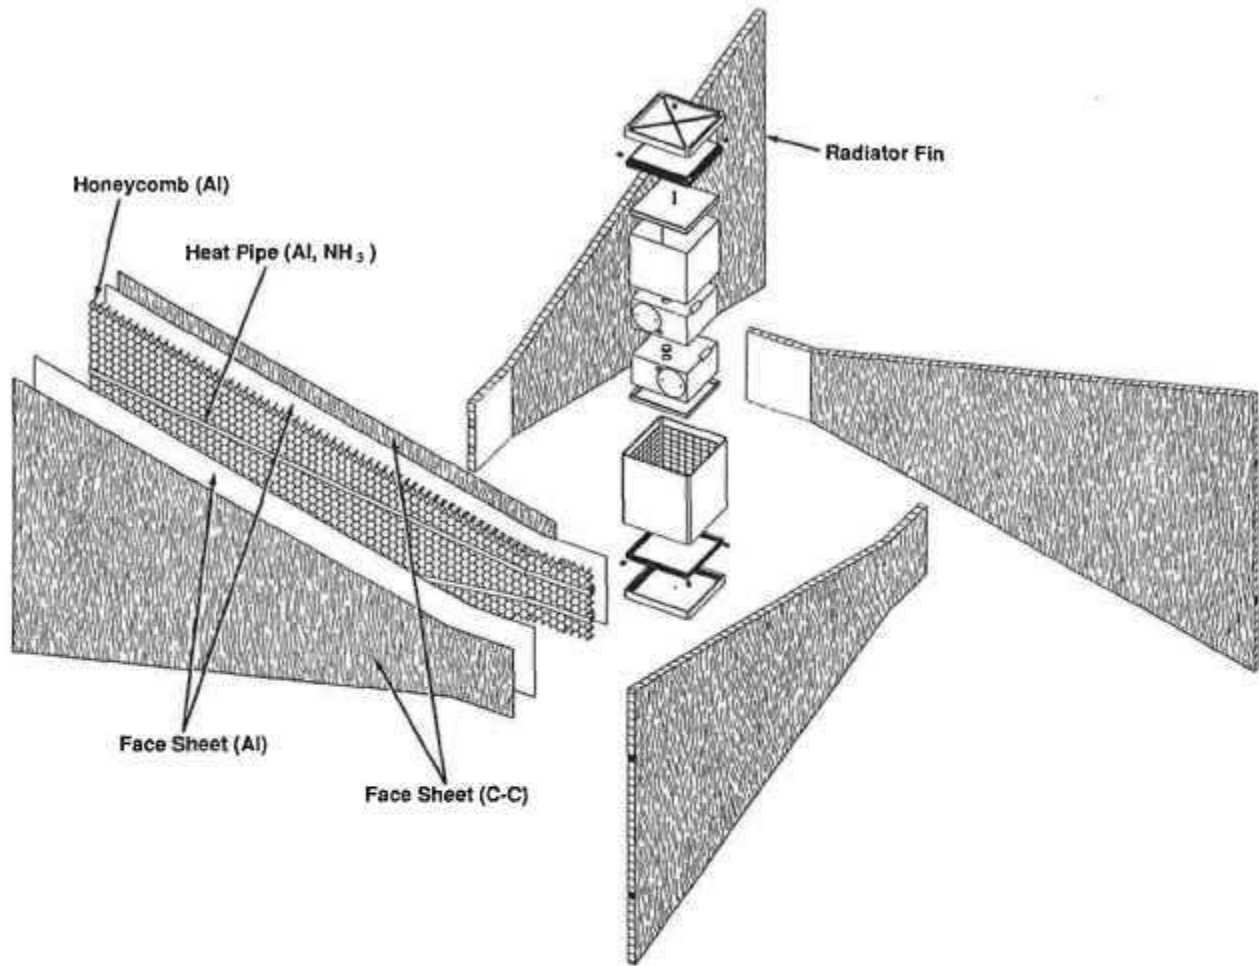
shows an exploded view of the generator and of one of the four radiator fins. The exploded fin view shows a central core consisting of an aluminum honeycomb with two embedded Al/NH₃ heat pipes. To each face of the honeycomb core two skins are bonded: an inner skin of aluminum to provide structural strength for resisting bending moments during launch; and an outer skin consisting of a graphitized carbon-carbon composite to provide high thermal conductance in the fiber direction. As indicated by the shading, the graphite fibers are oriented in the vertical direction, normal to the heat pipes' axes. In that direction they have a thermal conductivity twice that of copper, at about one fourth its density [13]. They serve to distribute the heat from the heat pipes over the width of the fin. They also provide the fin with high-emissivity surfaces. In our structural analysis we assumed that the graphite skin contributes zero strength in the direction normal to the fibers.
